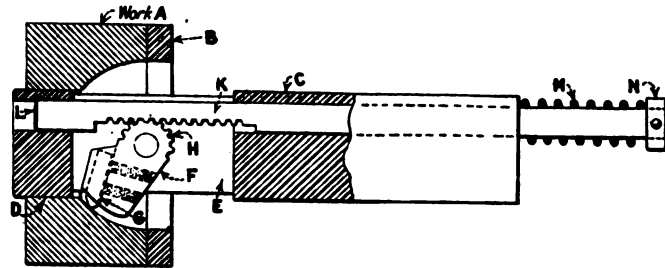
INSIDE SPHERICAL GENERATING TOOL
